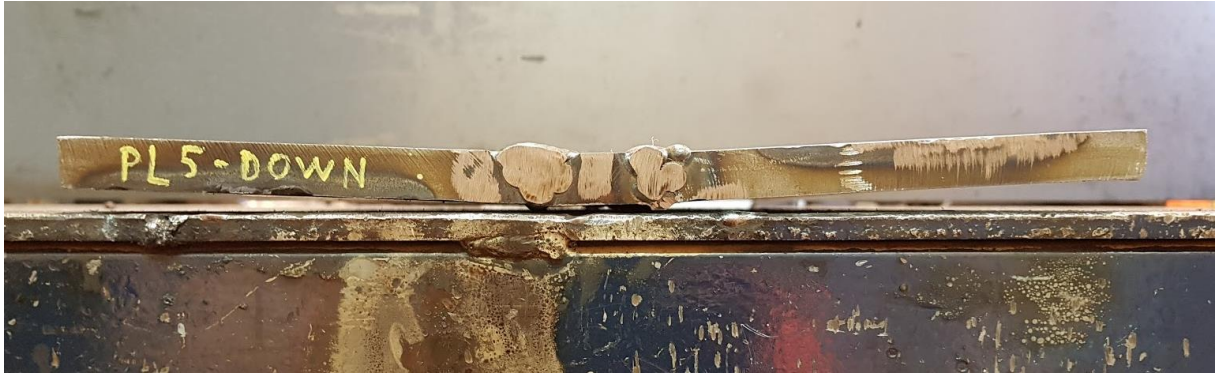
Weld distortion after second weld PL5.
